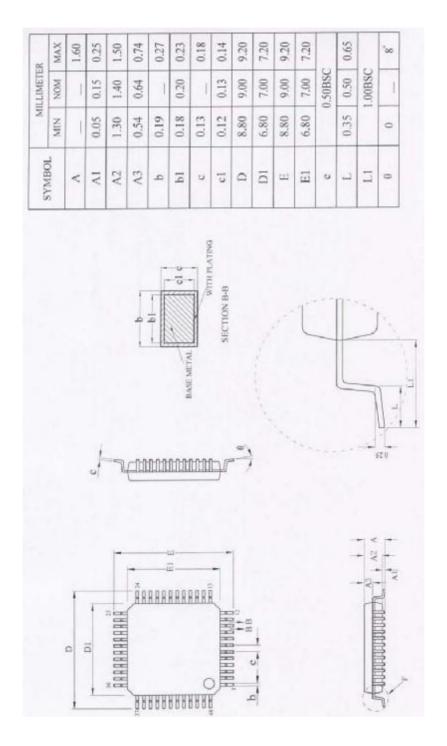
LQFP48-7x7mm Package Dimension Parameter
